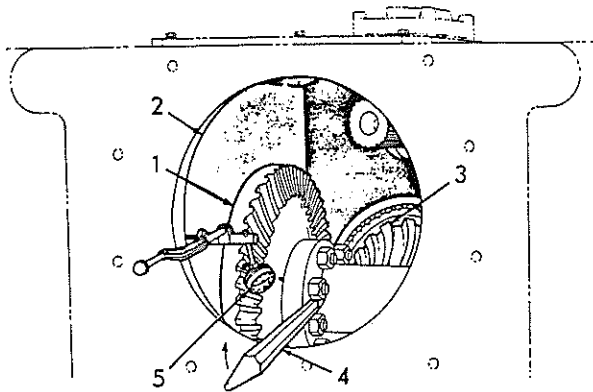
Checking Backlash Between Bevel Gear and Bevel Pinion (T-70855)
